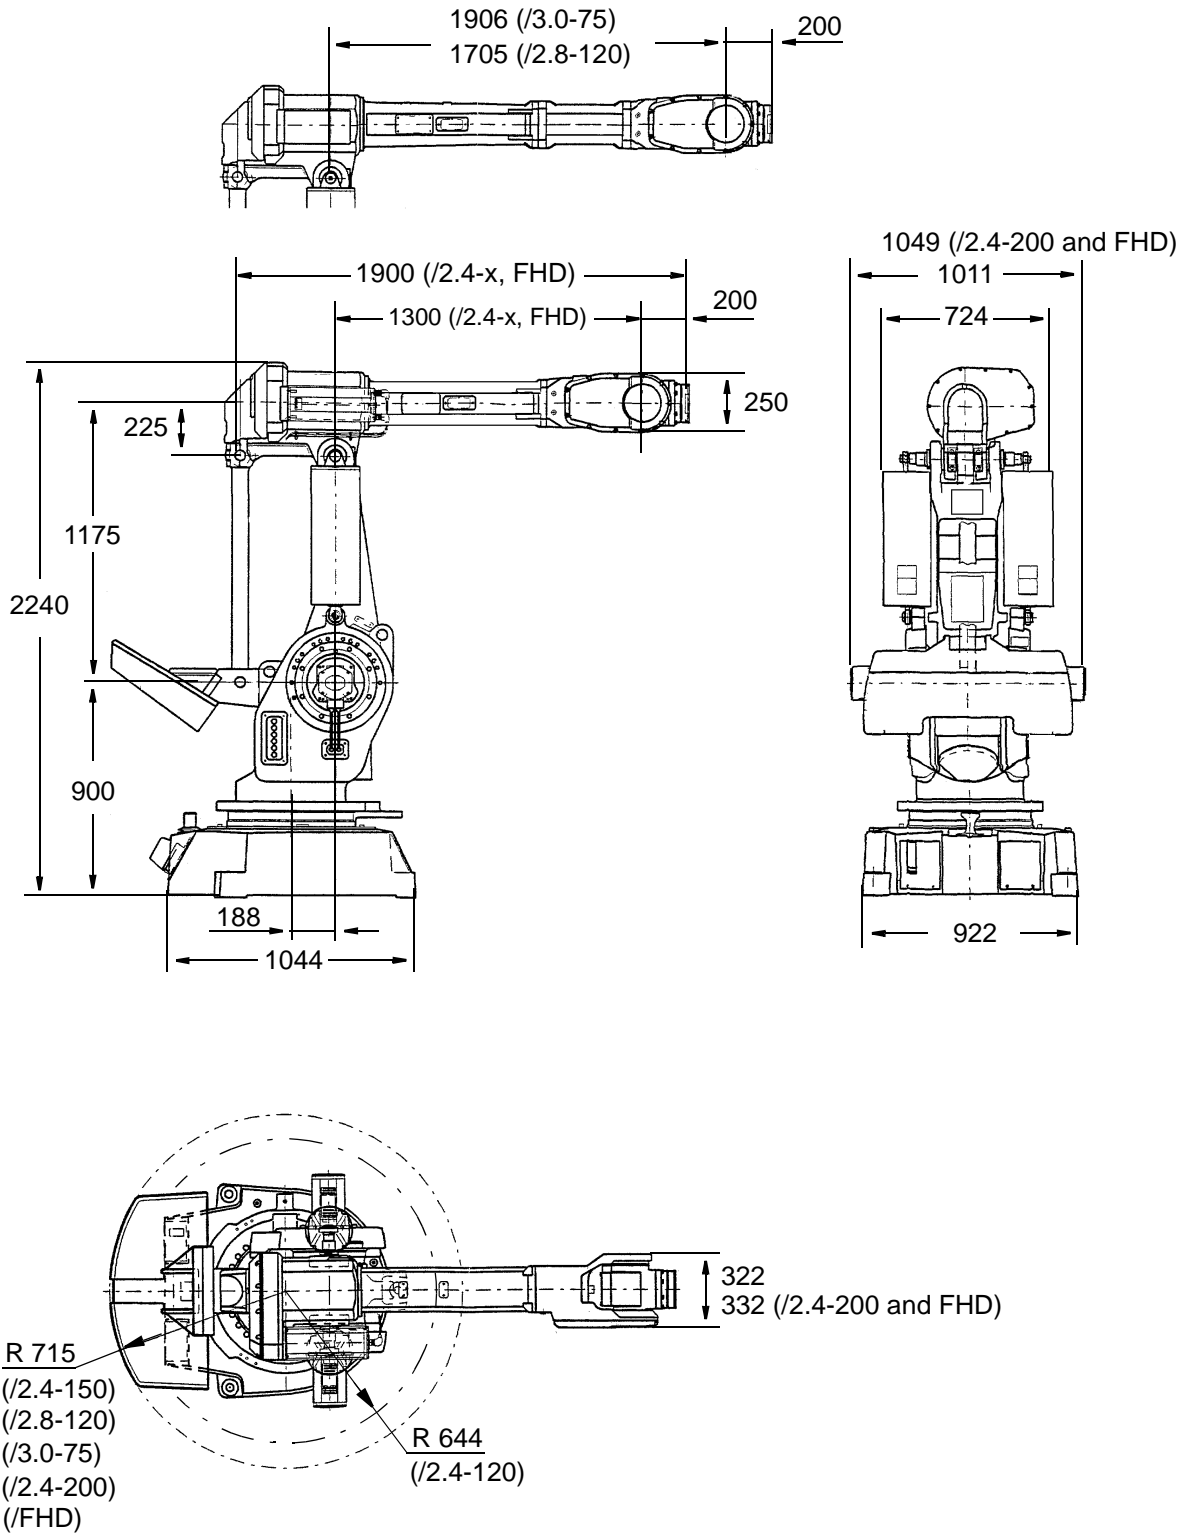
View of the manipulator from the side, rear and above (dimensions in mm).
